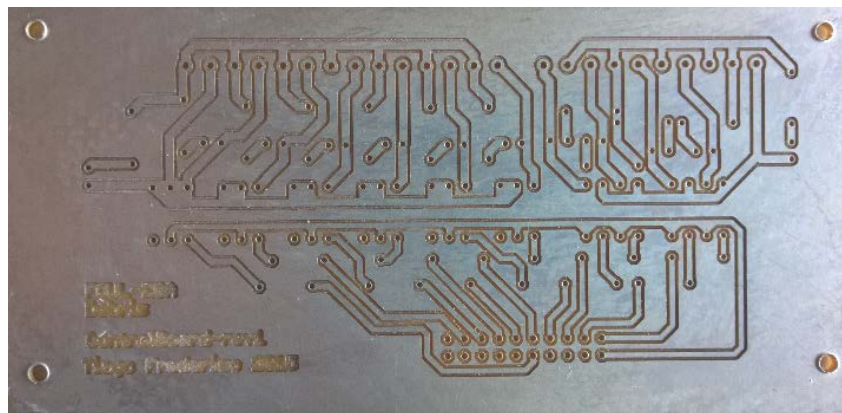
PCB after the milling and after depositing a very thin layer of tin.
